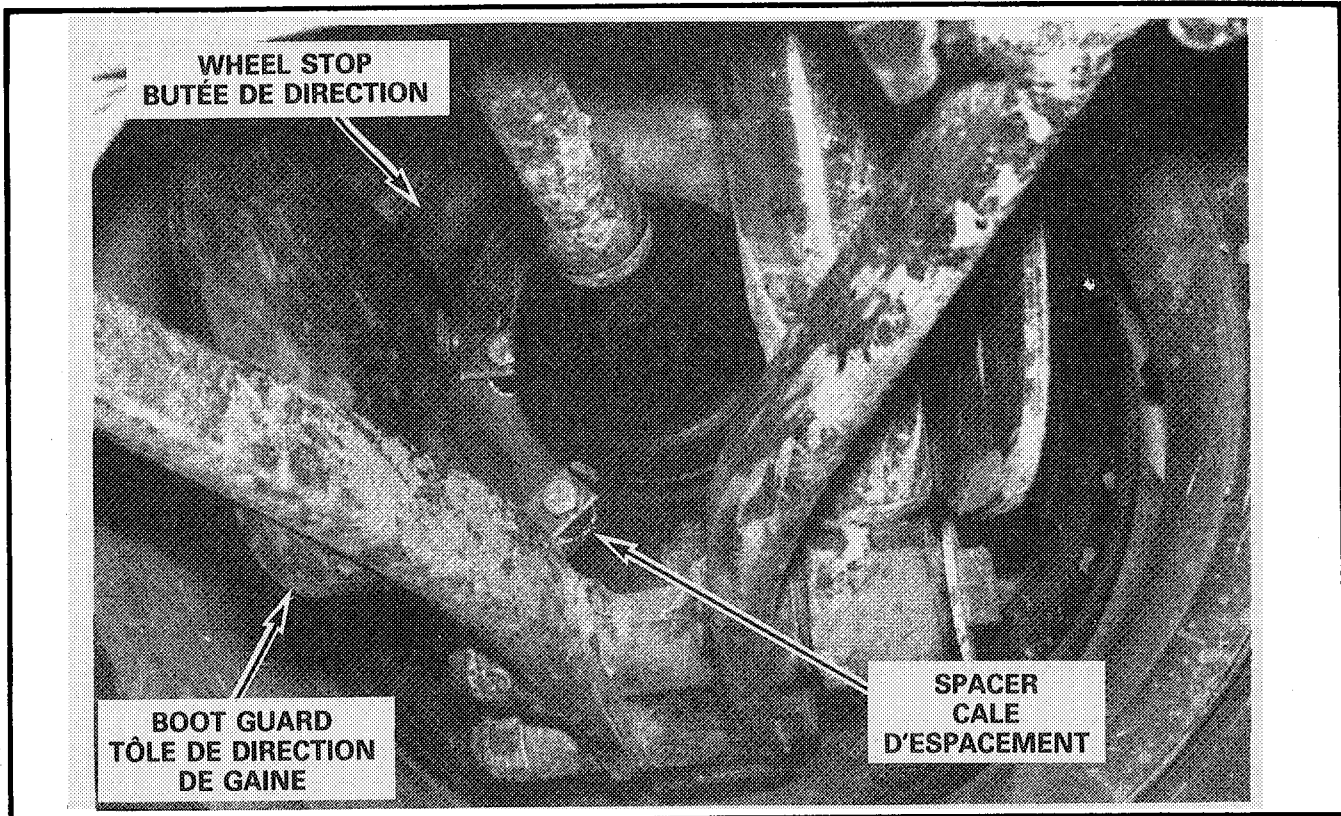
Left Front Wheel Axle Dust Boot and Spacers Installed
